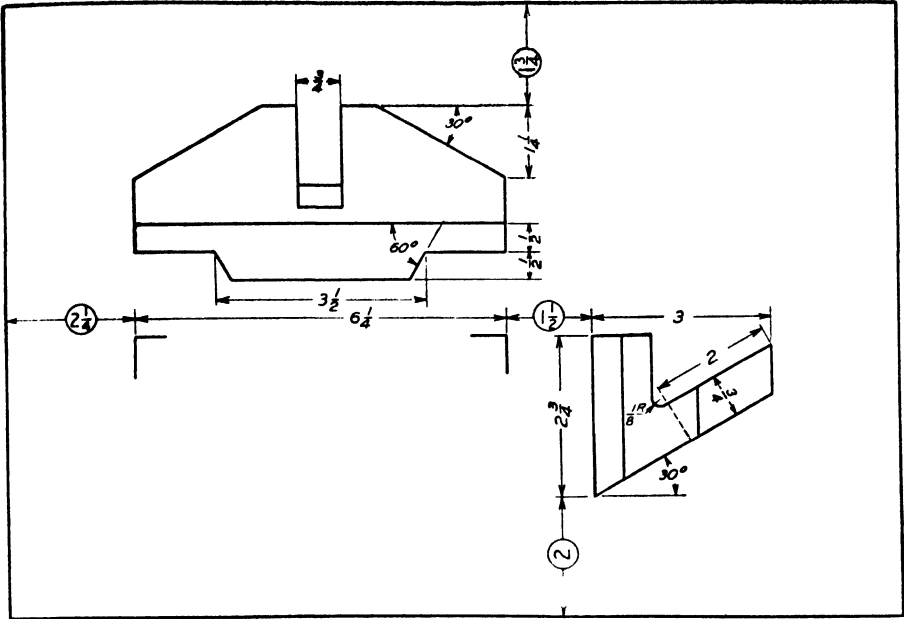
Prob. 119. Draw three views of the secondary guide lug.
